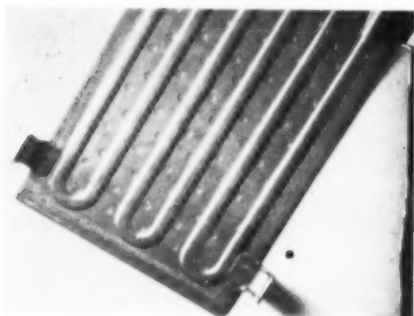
Part of a resistance welded refrigerator evaporator made of .044" thick silicon red brass sheet. The seam welds must remain gas tight under pressure. (Courtesy Westinghouse E. & M. Co.)
